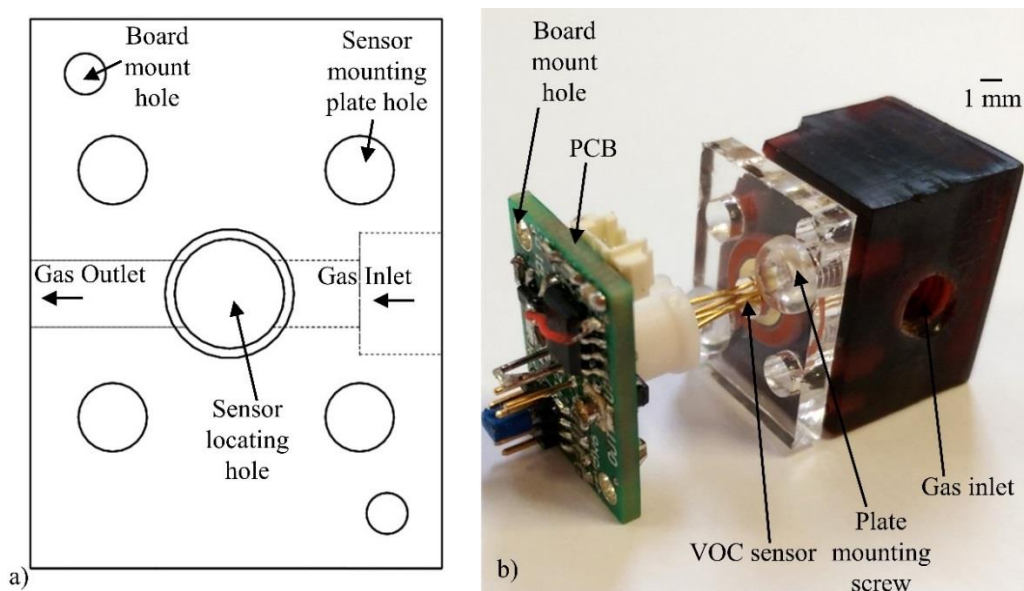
VOC sensor holder add-on module to the chamber, a) Sketch in Solidworks; b) 3D printed part with the VOC sensor on TO46 header inserted. Interface circuit board attached.
